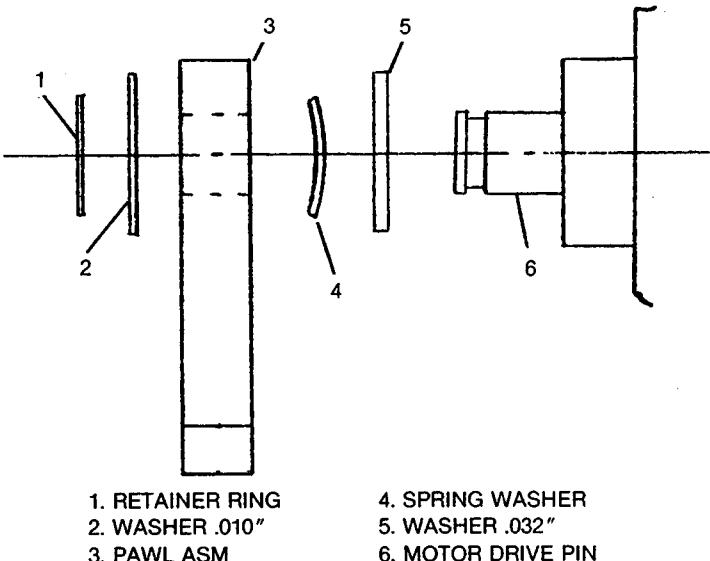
B — DRIVING PAWL ASSEMBLY DETAILS
